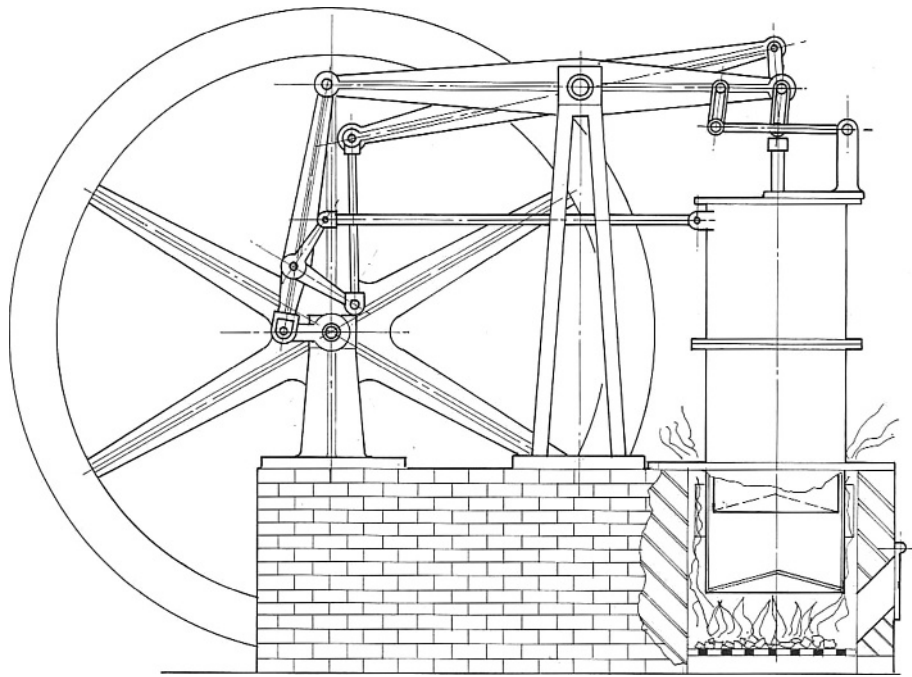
How the quarry engine might have appeared after inversion of the cylinder unit to allow heating to a viable operating temperature
